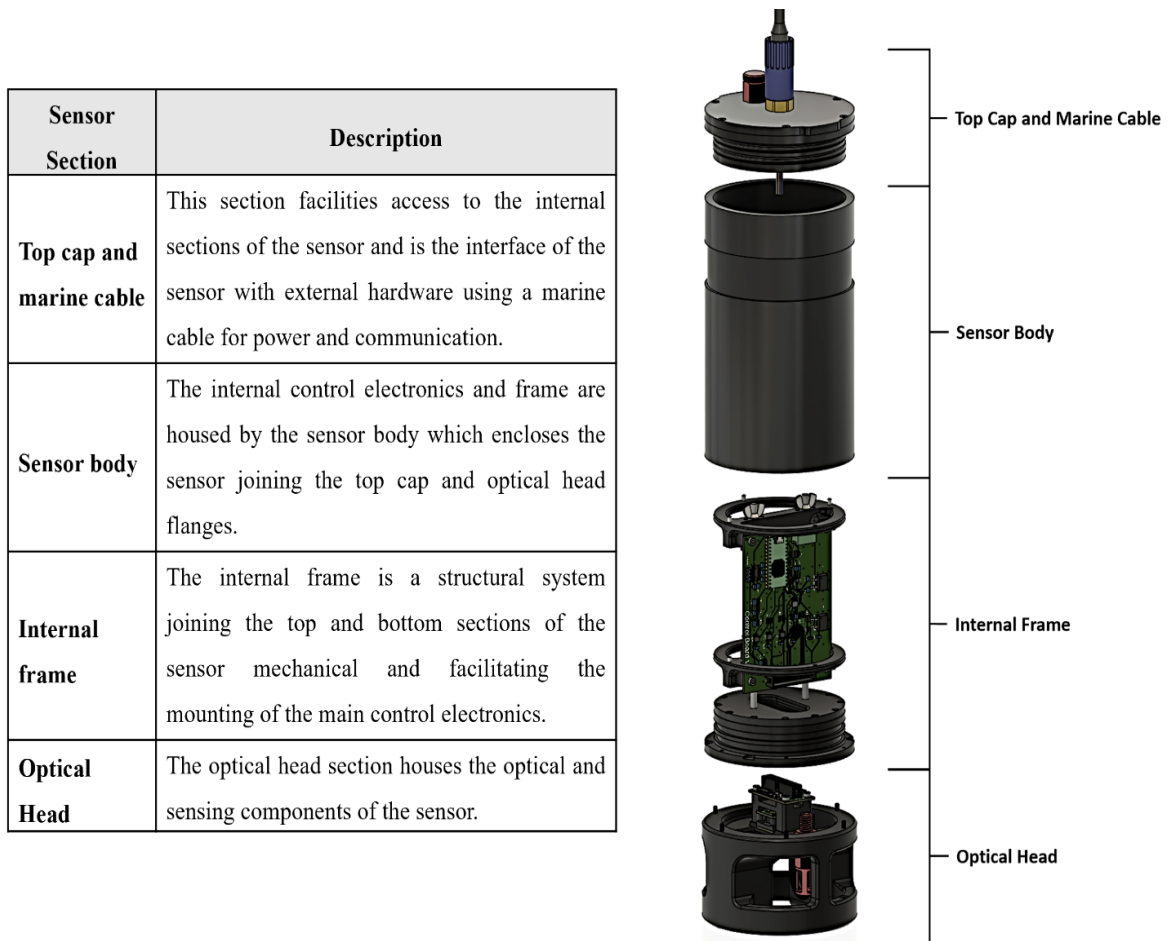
Overview of sensor design sections with table of section descriptions and labelled exploded view of sensor sections.
